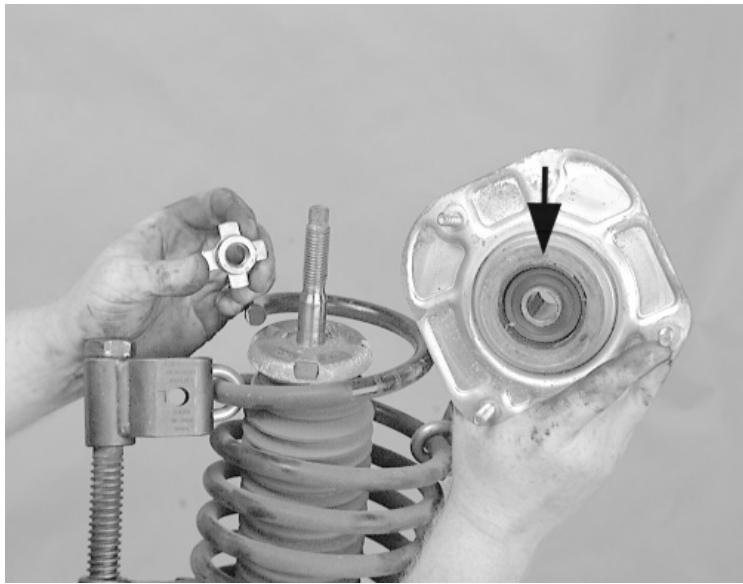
Remove the bearing and upper spring seat ...
